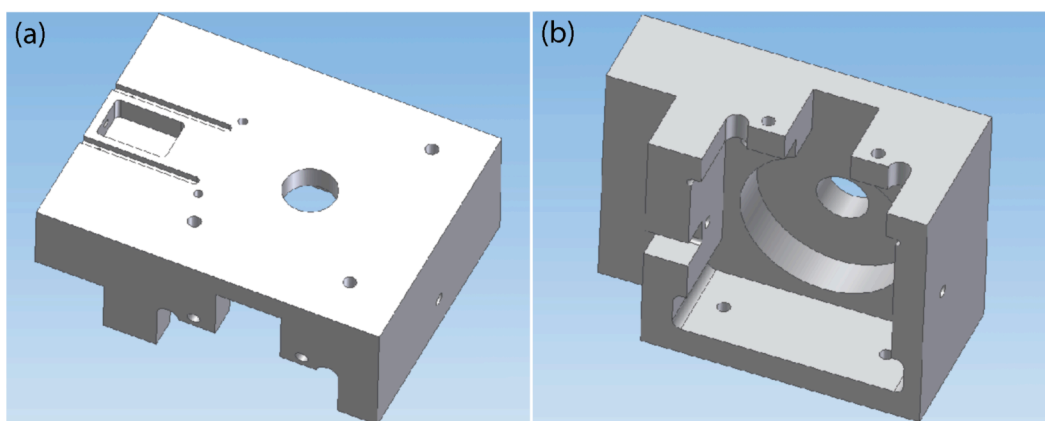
CAD drawing of the Al fixture, viewed from the top (a) and from the bottom (b). The shape is designed to fit over the Peltier cooling stage shown in Figure 7, and the central opening provides access to the Peltier-cooled area of the cooling stage.
